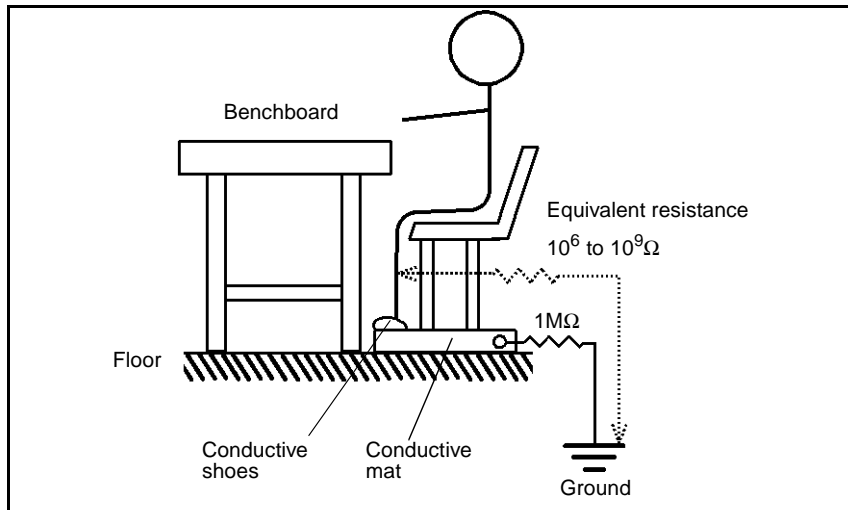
Countermeasures for Static Electricity of Work Site Floor
